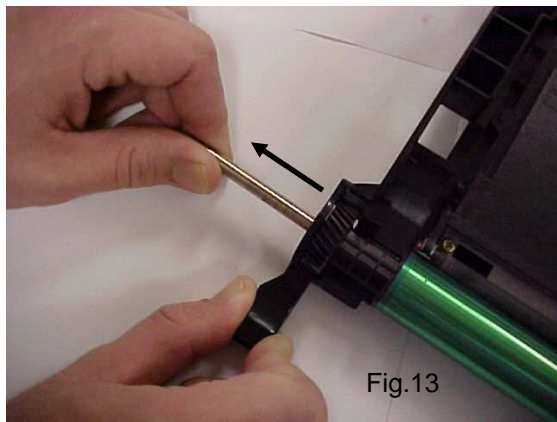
Slide the drum axle out through the gear side of the waste hopper.
